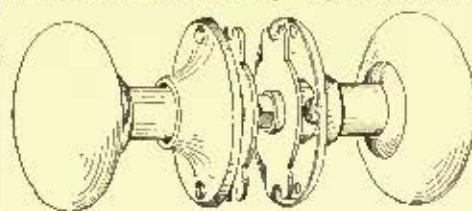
Knob and Spindle-screws covered. Russell & Erwin Mfg. Co.
